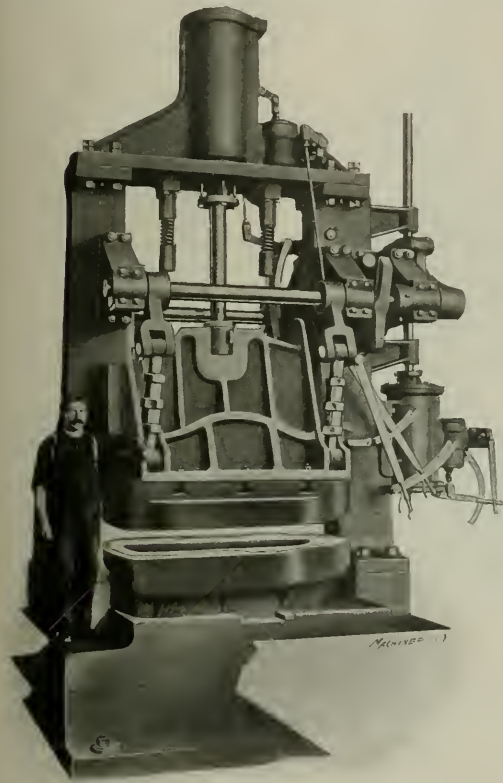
Steam Actuated Toggle Press for Heavy Stamping and Forming.
